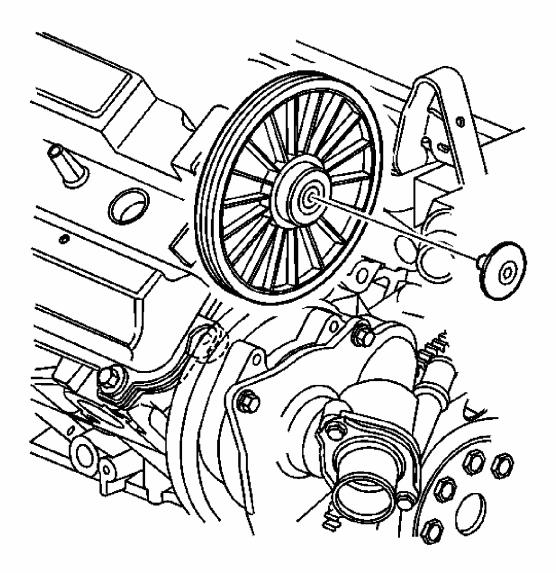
Identifying Intake Camshaft End Cap Courtesy of GENERAL MOTORS CORP.
